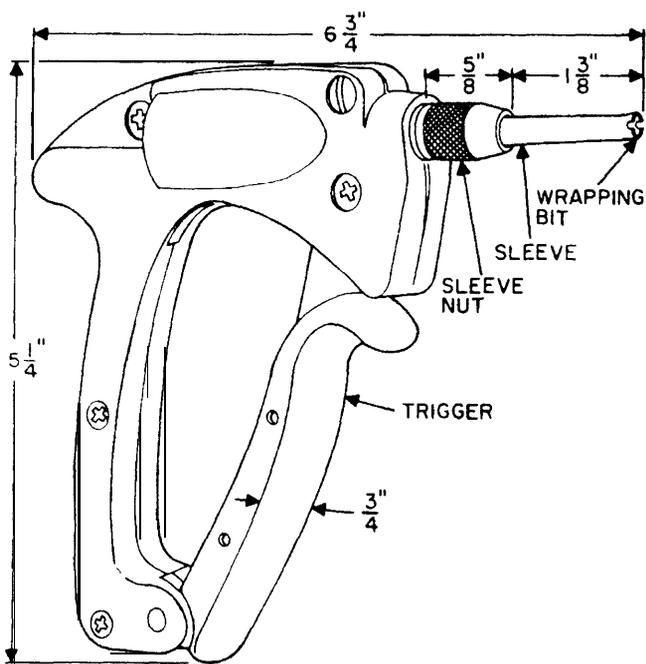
Spring Loaded Hand Operated Wrapping Tool.
